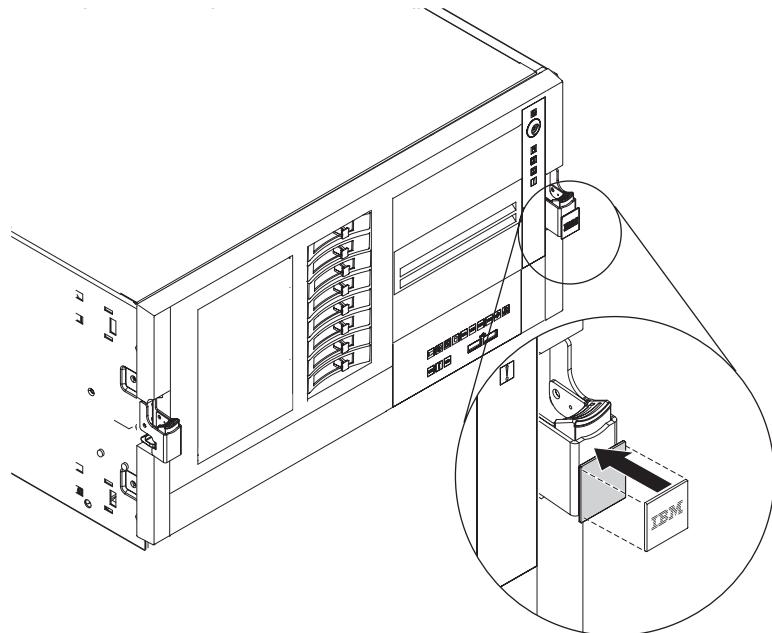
Attaching the IBM logo to the right release-latch bracket assembly
